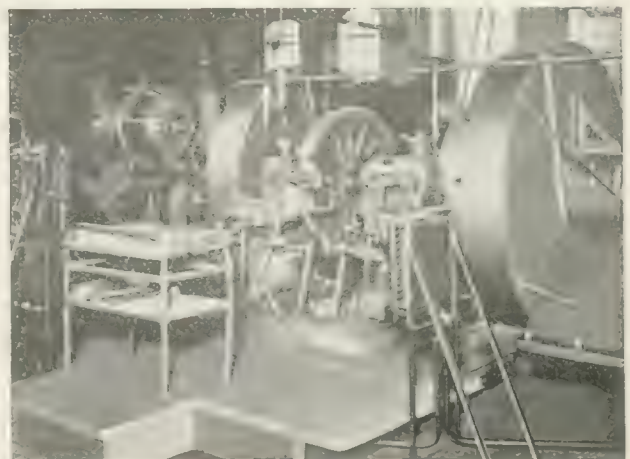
AN AUTOMATIC CONTROLLER APPLIED TO A CAR-WHEEL LATHE
